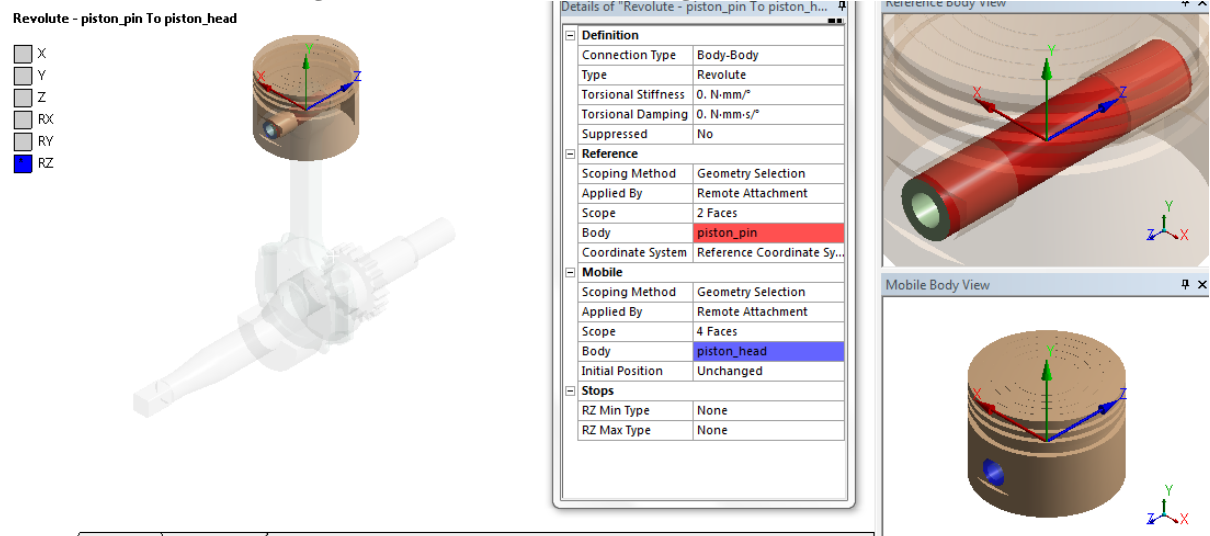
6a Revolute Joints (Piston pin to Piston head )
